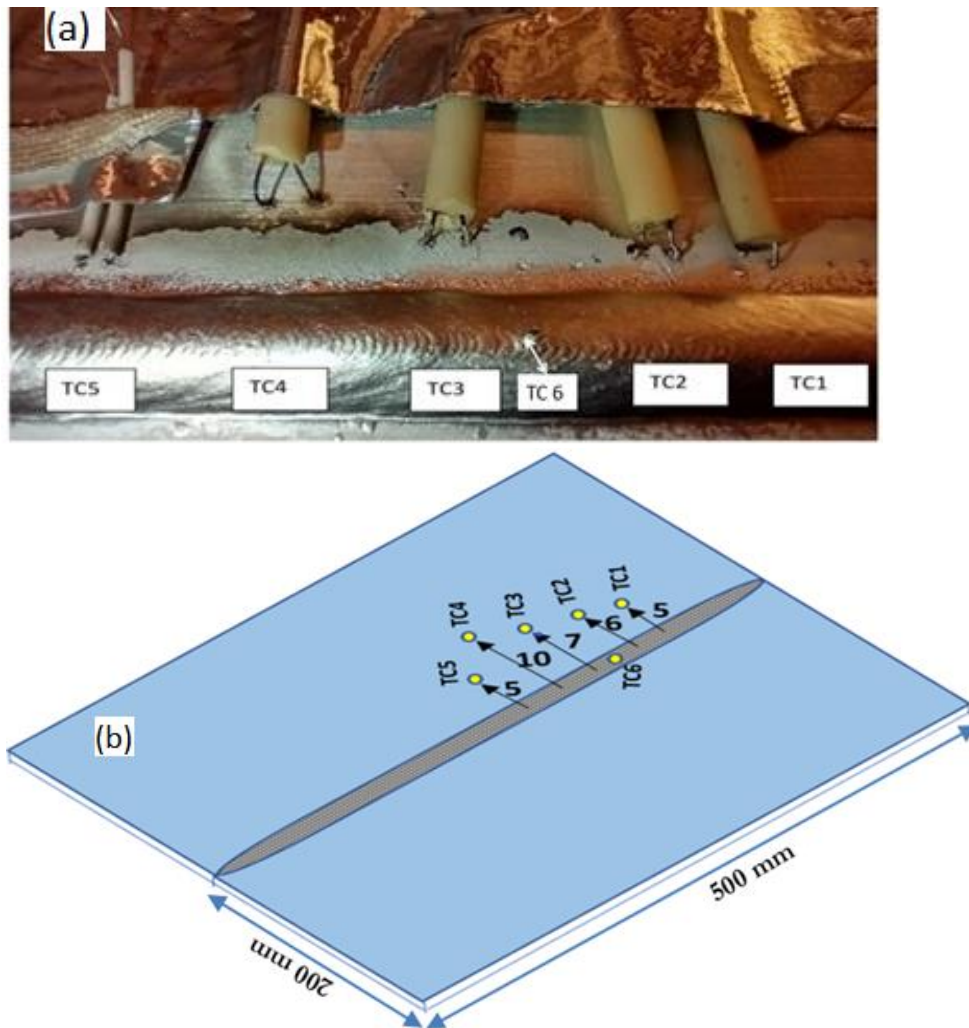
a-Attached TC on the plate; b-Skitch of the welded plate with TC locations.
